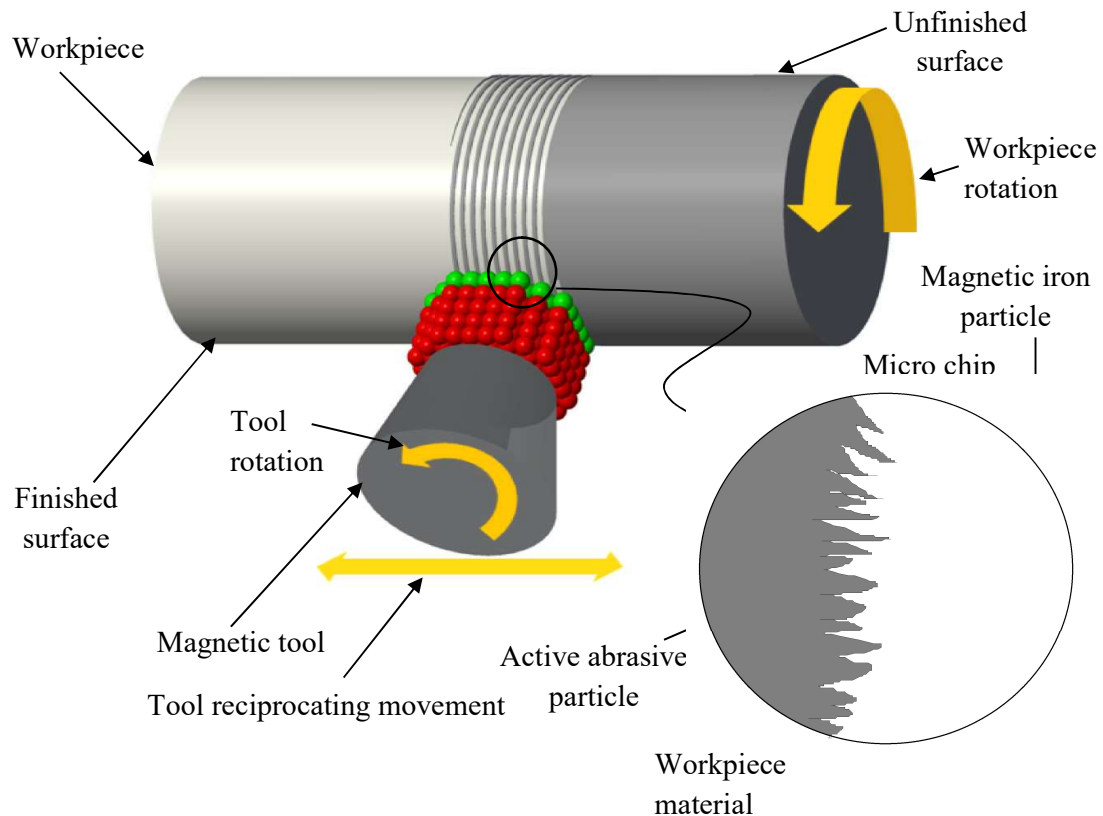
Mechanism of material removal and formation of helical path on cylindrical workpiece
